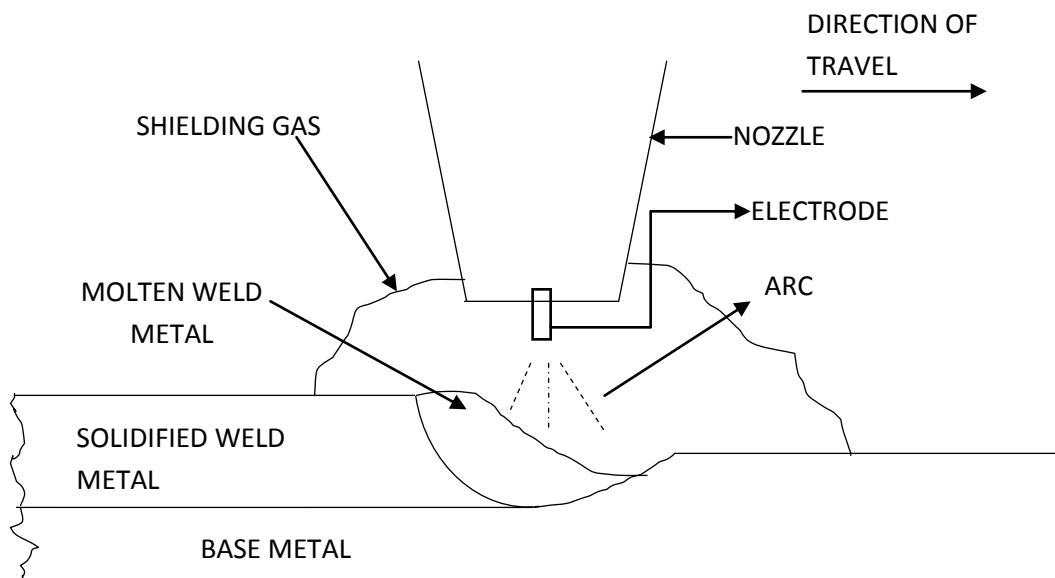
Schematic diagram of MIG Welding Process
